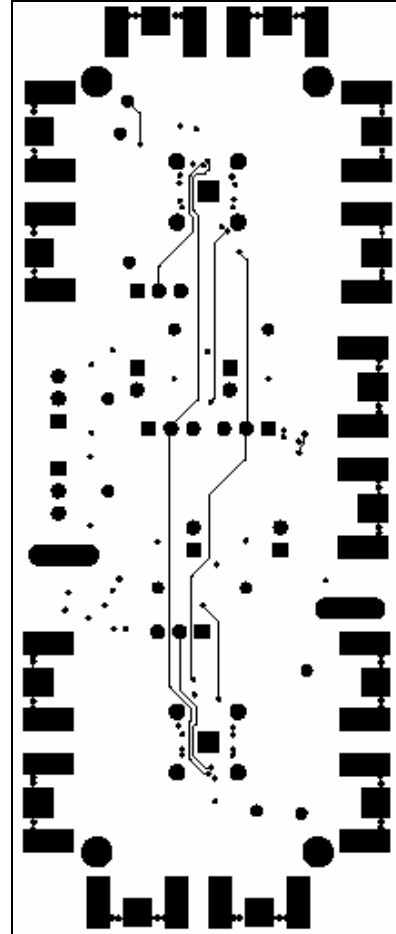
MAX3991/MAX3992 EV Kit PC Board Layout—Solder Side
